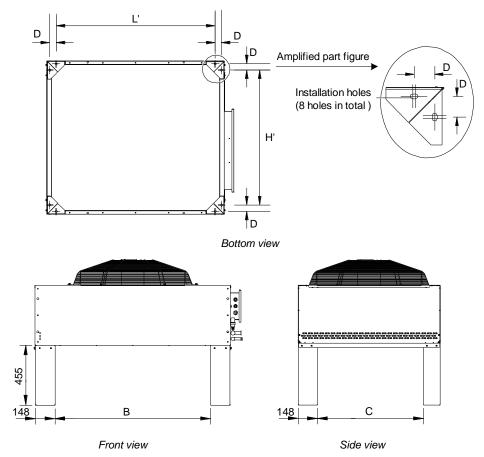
Mounting base dimensions for horizontal installation (unit: mm)
